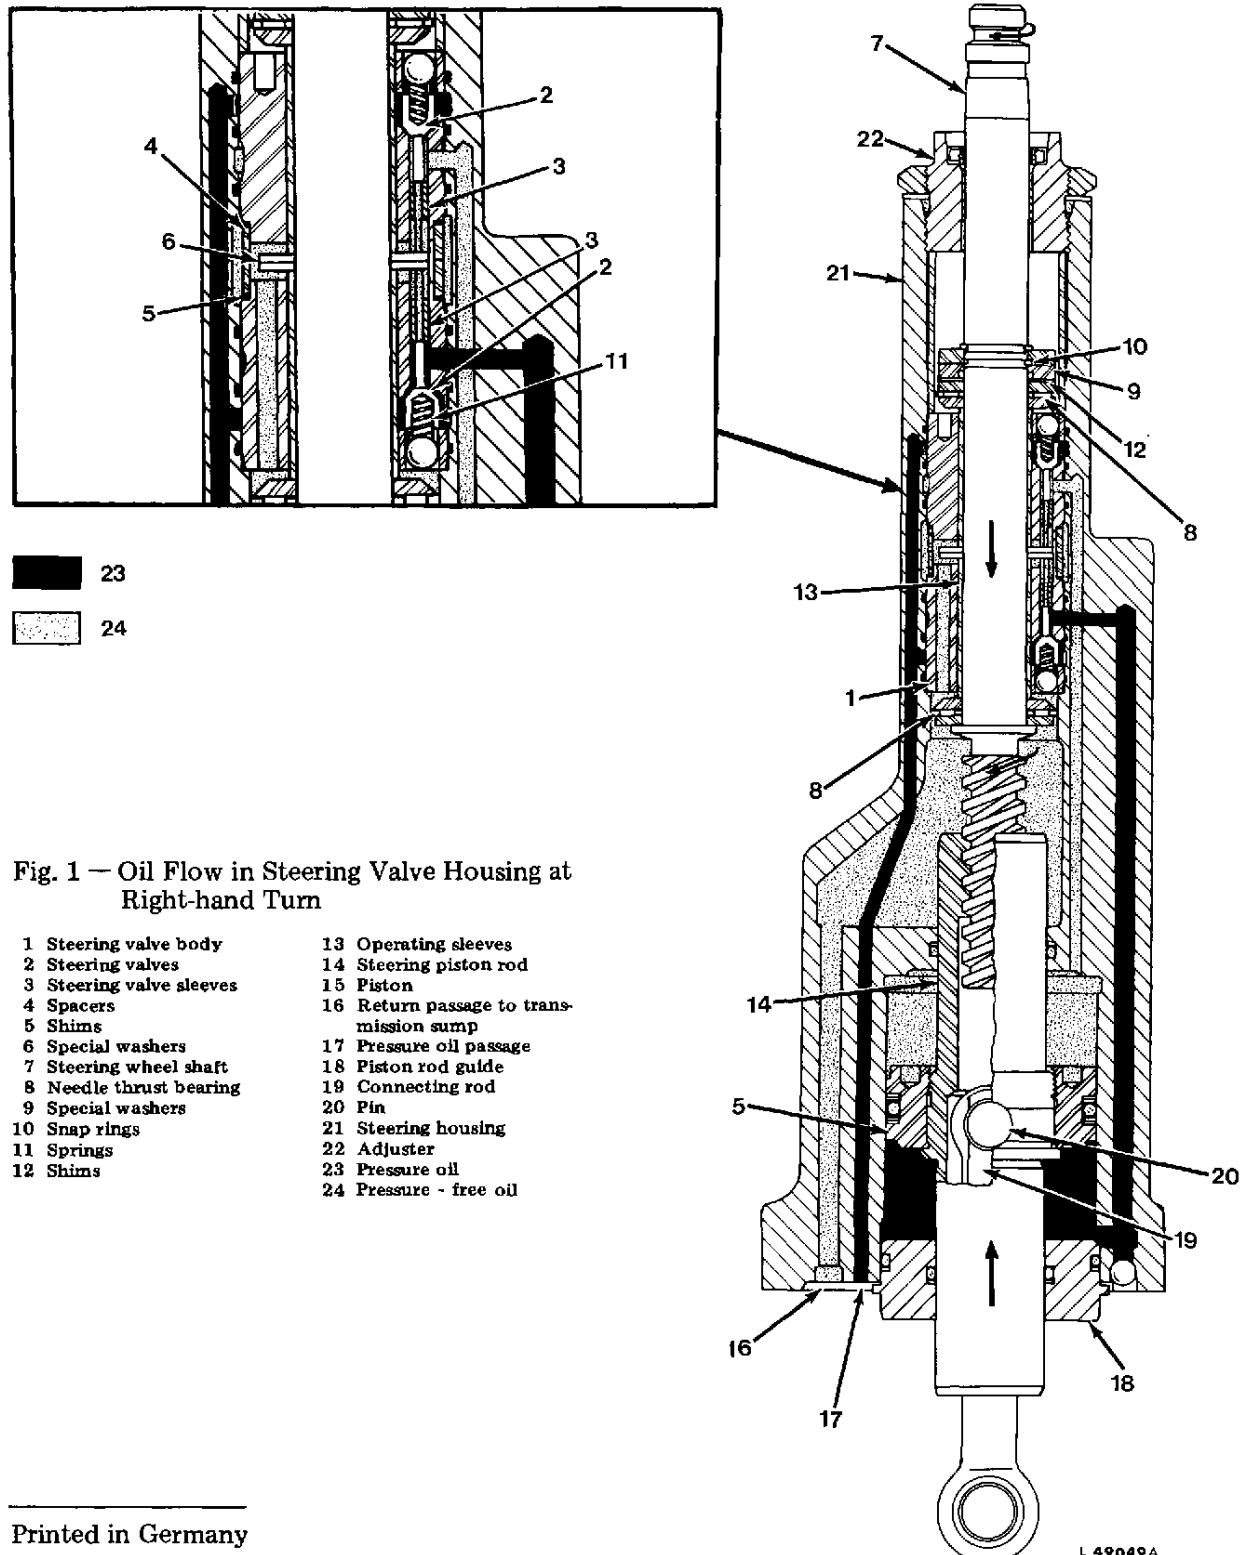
Oil Flow in Steering Valve Housing at Right-hand Turn
